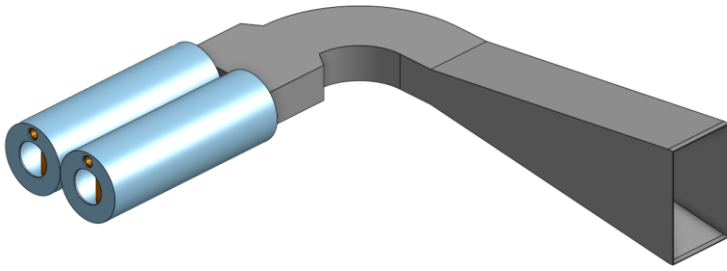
Isometric View of the Assembly (air duct and heat exchanger)
